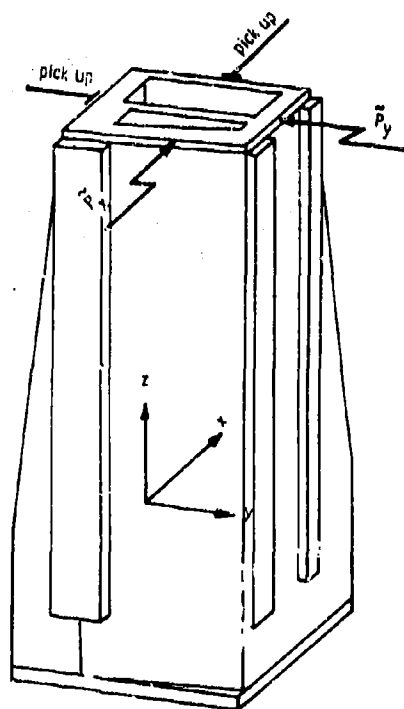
Exciting Scheme of a Machine Tool Column
